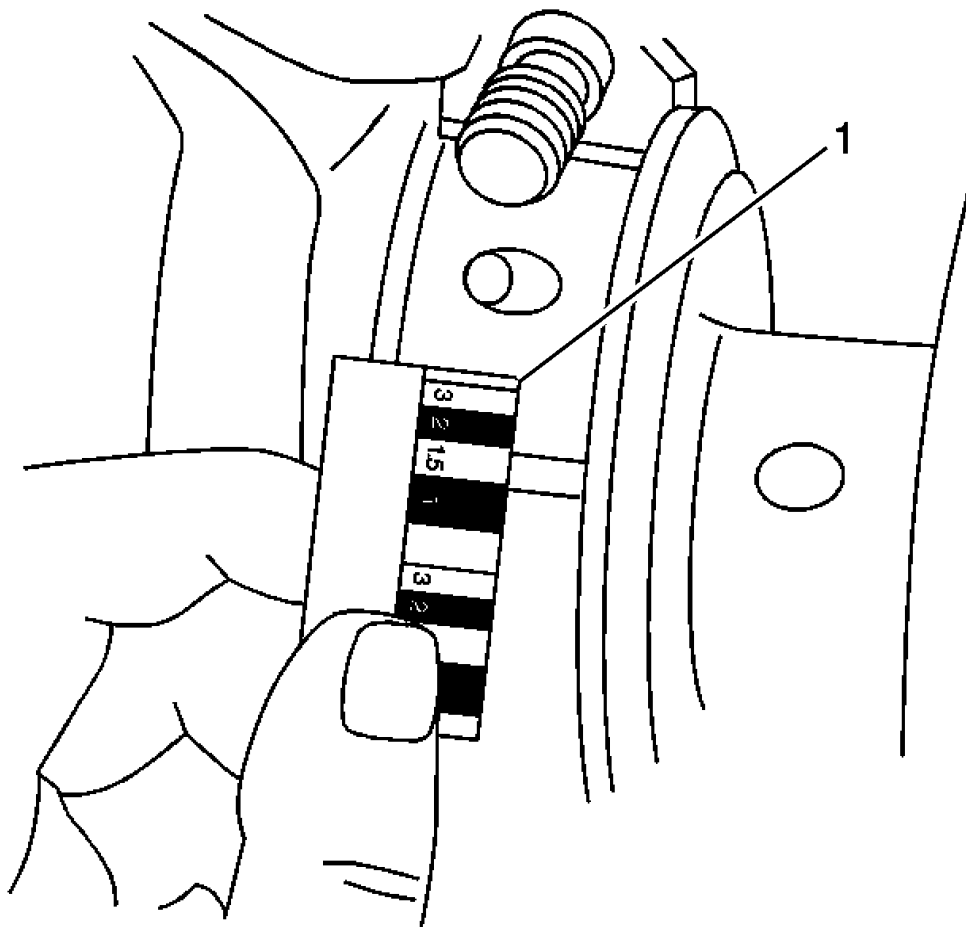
View of Measuring Crankshaft Bearing Journal Using Method A
